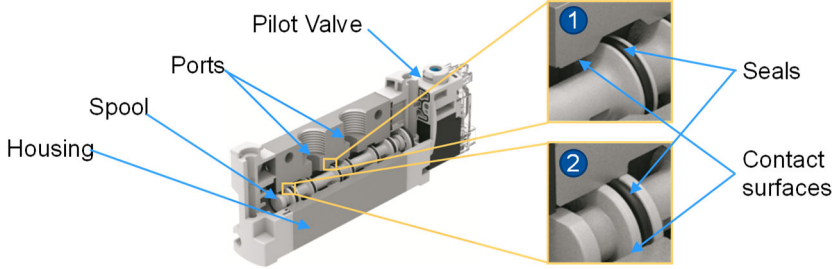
An image of a pneumatic spool valve with its seals. Picture provided by courtesy of Festo. [5]
